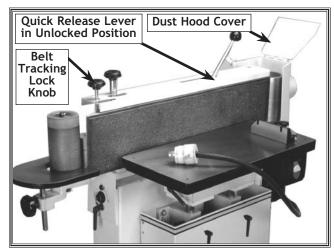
Belt tracking lock knob, dust port cover, and quick release lever.
